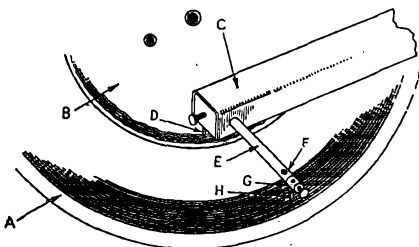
Device for driving a cutter head for home recordings. (A) Master pregrooved 12-inch blank. (B) Recording disc, 6½-inch diameter. (C) Cutter head and arm. (D) Cutting needle. (E) Drive bar. (F) Set screw. (G) Binding-post chuck. (H) Tracking needle.
